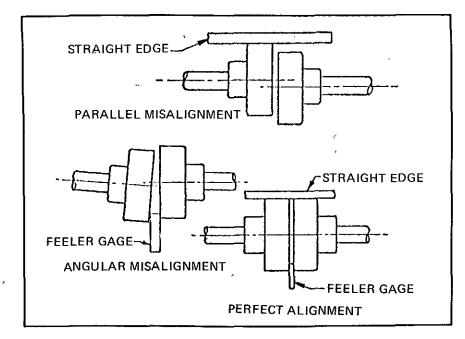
TESTING ALIGNMENT, STRAIGHTEDGE
